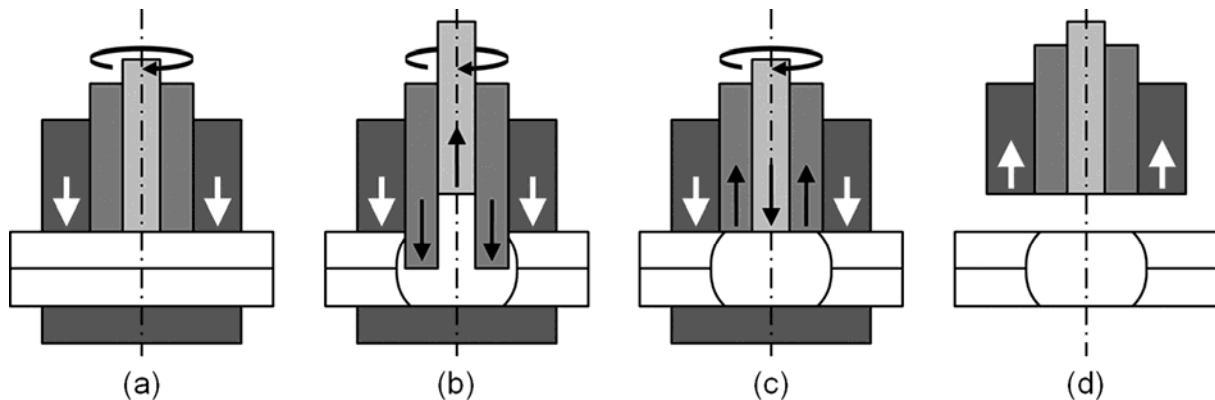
Illustration of “sleeve plunge variant” stages: (a) clamping and tool rotation; (b) sleeve plunge and pin retraction; (c) parts back to surface level; and (d) tool removal.
